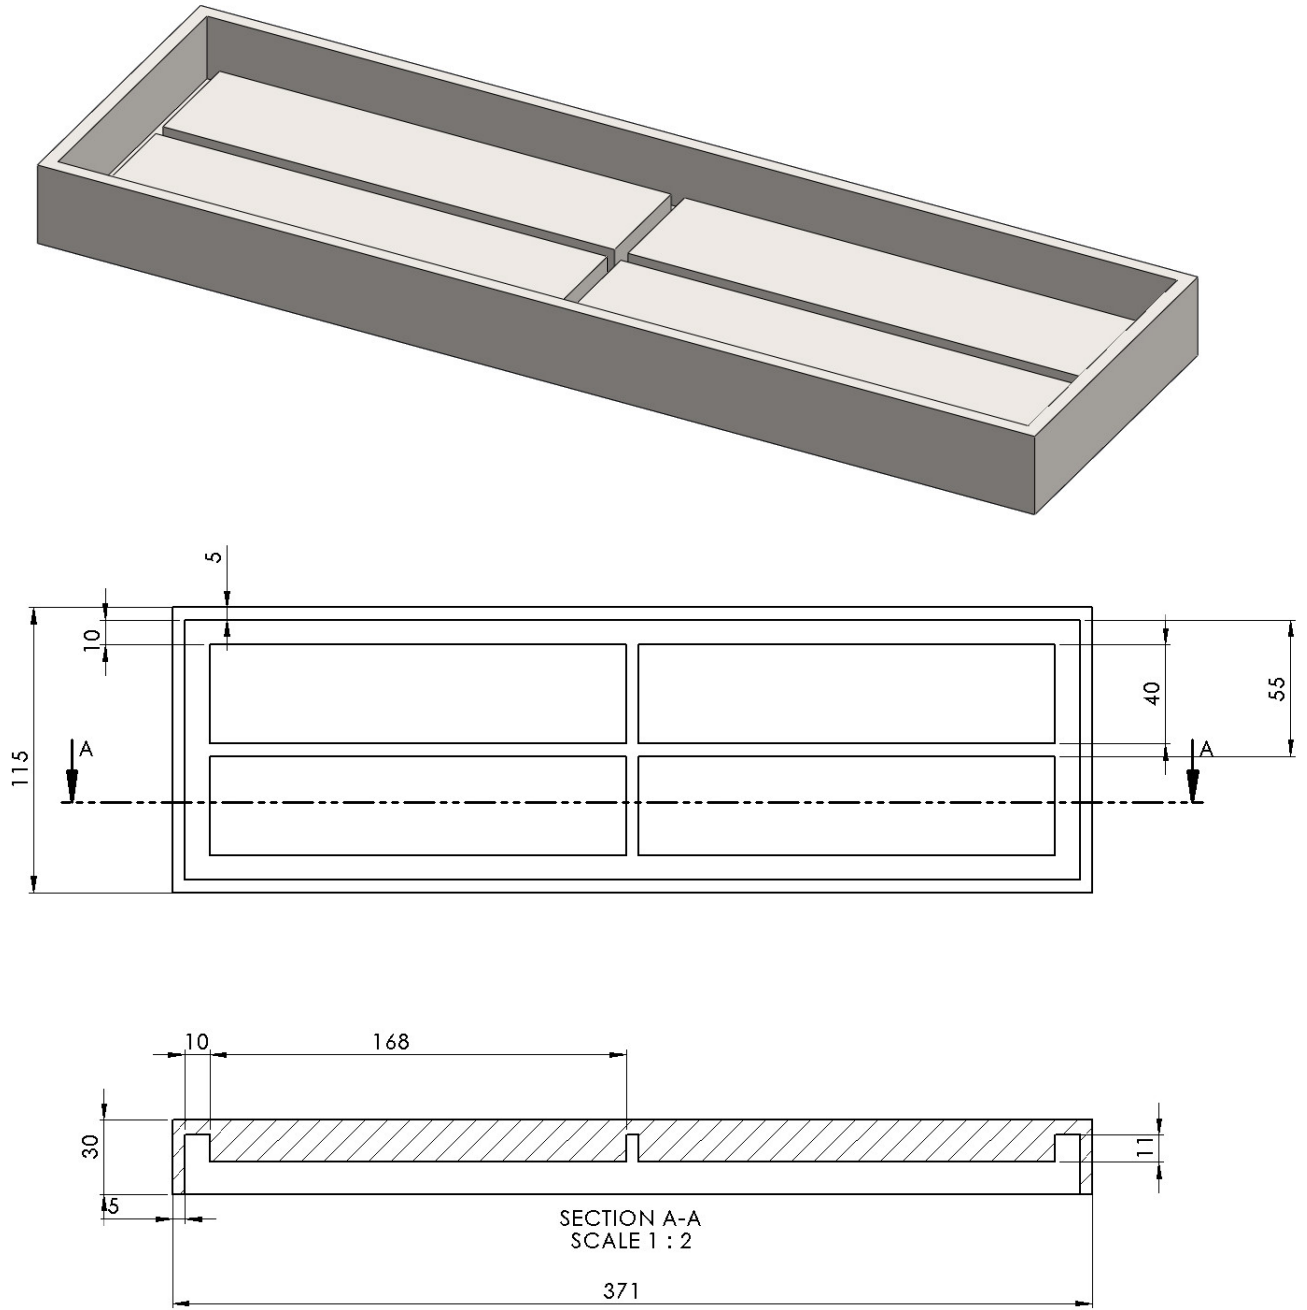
Medium Specimen Mold Positive. Units: mm
